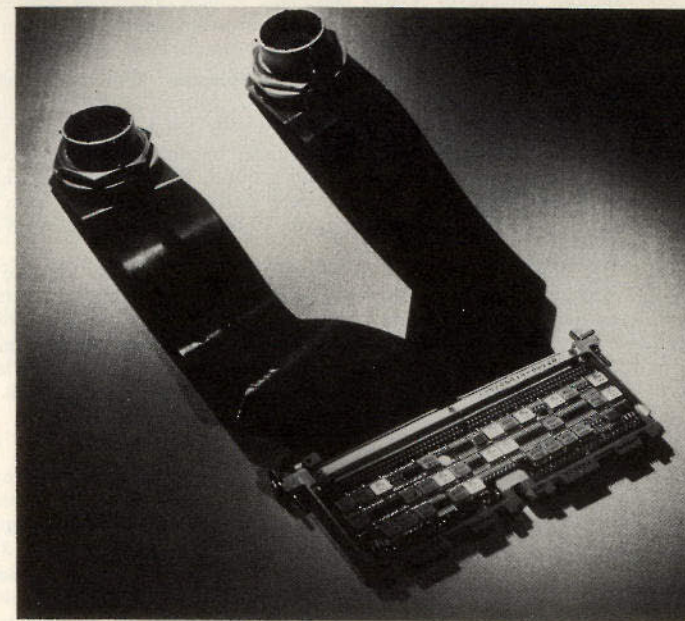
Multilayer flexible printed circuit assembly (IBM).
